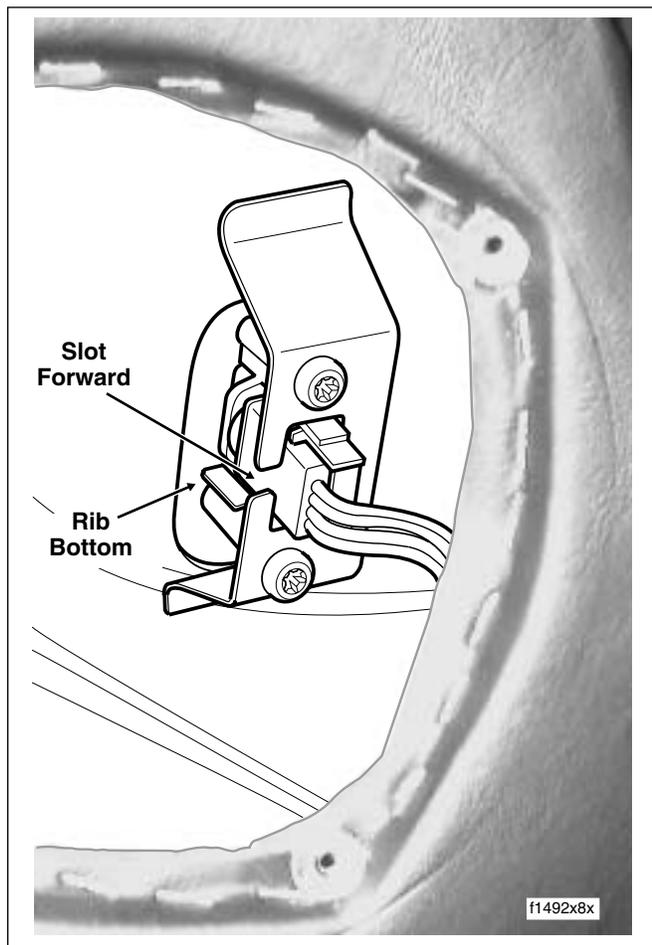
Install Passenger Switch Assembly (Right Side Speaker Box Shown)
